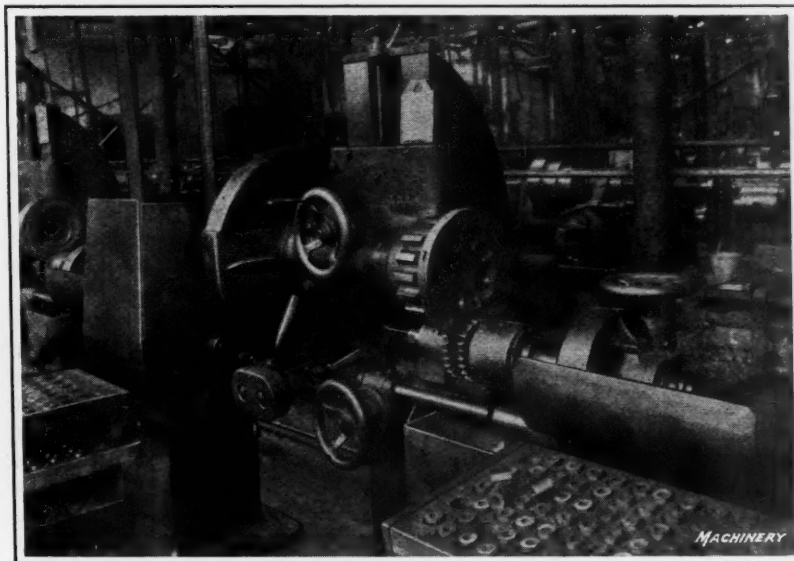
Milling Machine equipped with Rotary Fixture for straddle-milling the Ends of Cast-iron Bushings
